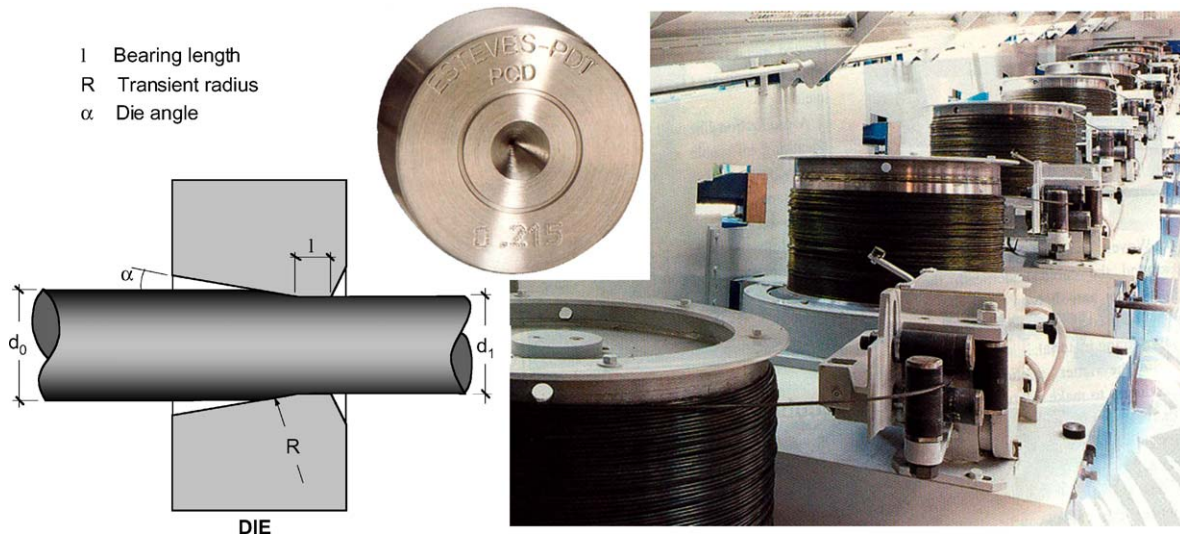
(Left) Die geometry used for cold-drawing. (Right) View of commercial wire-drawing machines. (Insert, a picture of a die).
